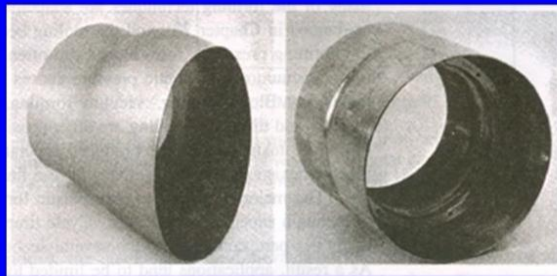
Parts shaped by Electromagnetic Forming, dia 125 mm.
